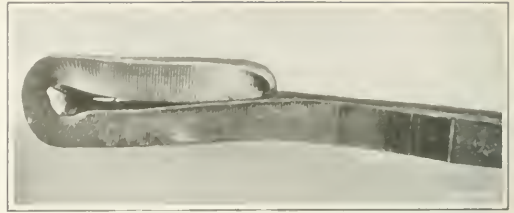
Test Specimen bent Cold, showing Ductility of Weld
